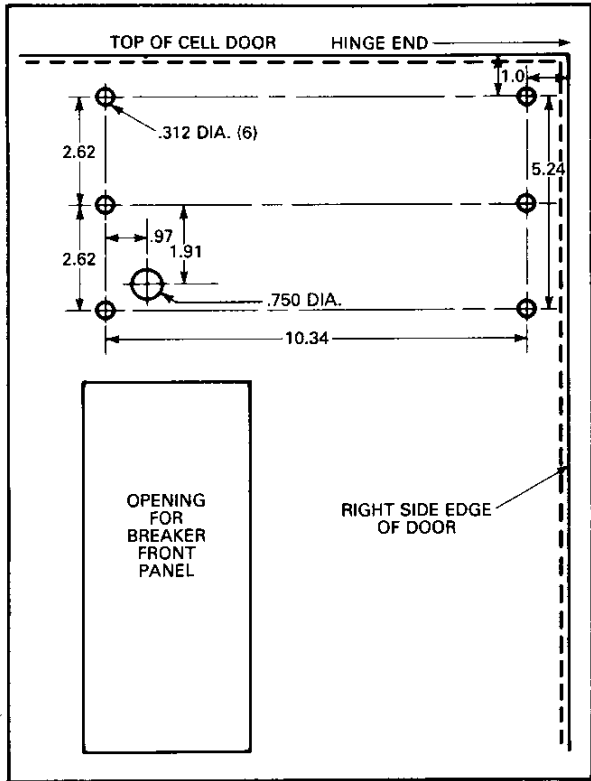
Amptector Mounting Details Horizontal Mount AK-2A-25 Front View of Cell Door
